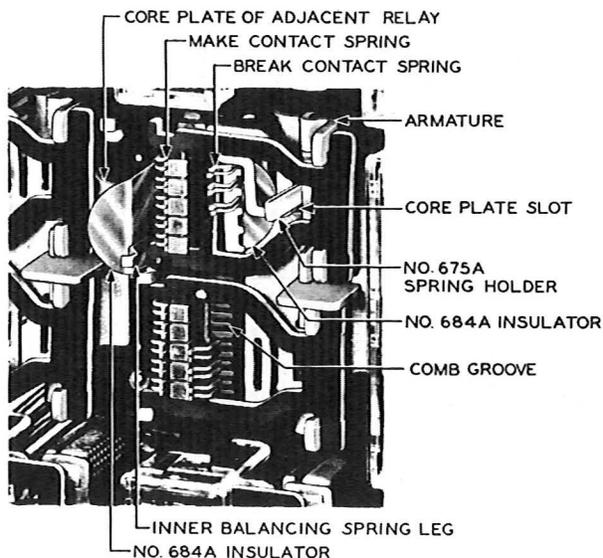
No. 684A Insulators and No. 675A Spring Holder Mounted on Upper Half of Relay
